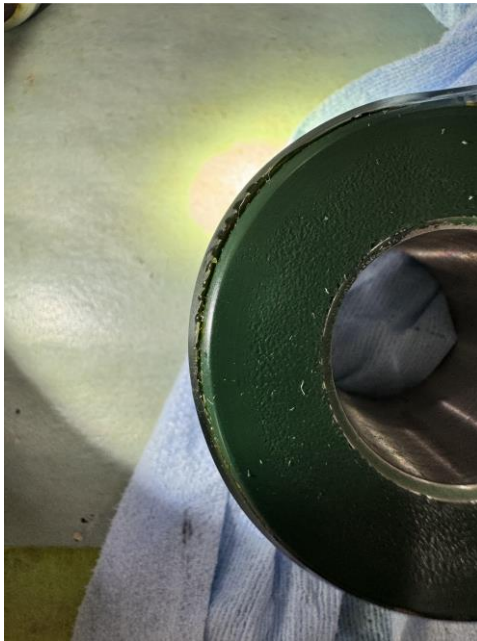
Crack in the urethane coating on a Airwolf TT strap installed on a Bell 206B helicopter
